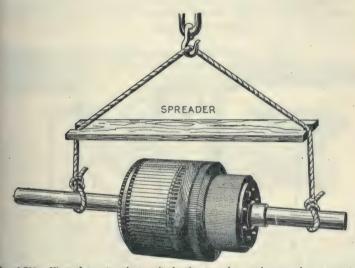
View of armature in transit showing use of a wooden spreader as a protection.
